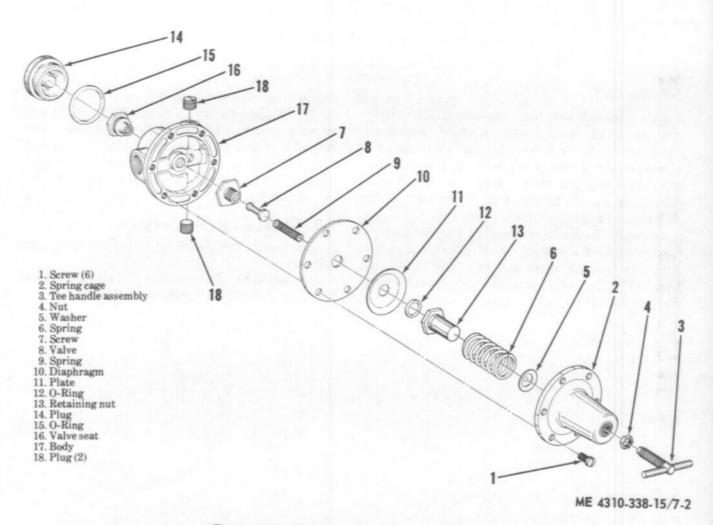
Air pressure regulator assembly; disassembly and reassembly.
